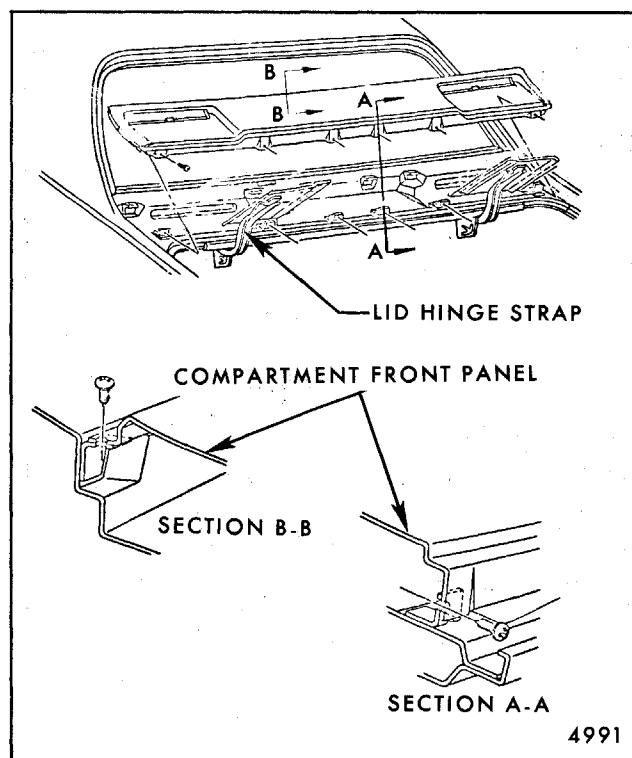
Rear Compartment Front Panel - Oldsmobile "E" Style
